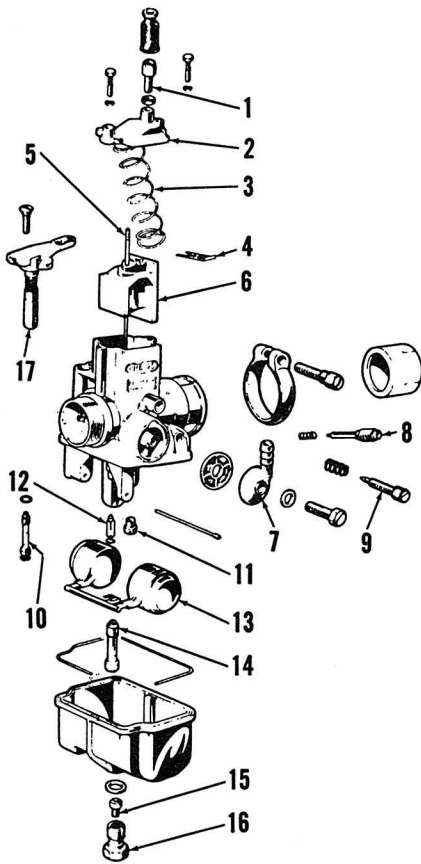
Exploded view of Del'Orto 22 MM carburetor used on all models.
